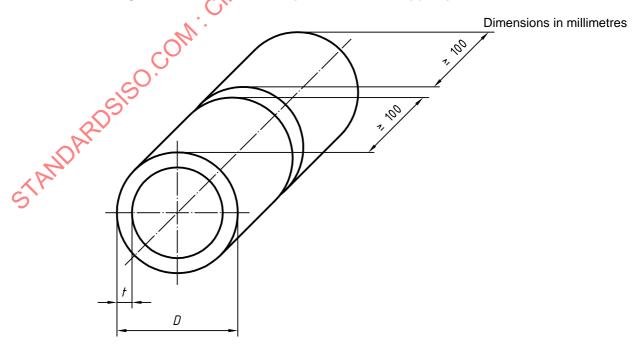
Dimensions of test piece for a butt weld in pipe
